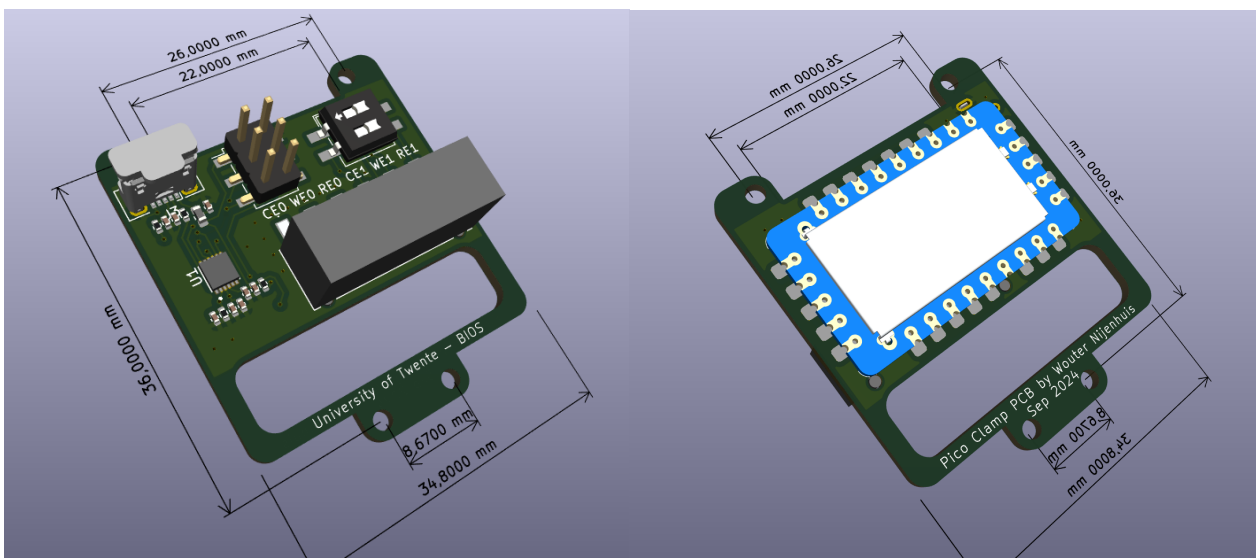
3D model of the proposed PCB design. The mounting holes line up with the screws for MFBB attachment and the hole in the PCB is for electrodes to pass through to the clamp on the top side. The EmStat Pico Module occupies the whole board on the back.
